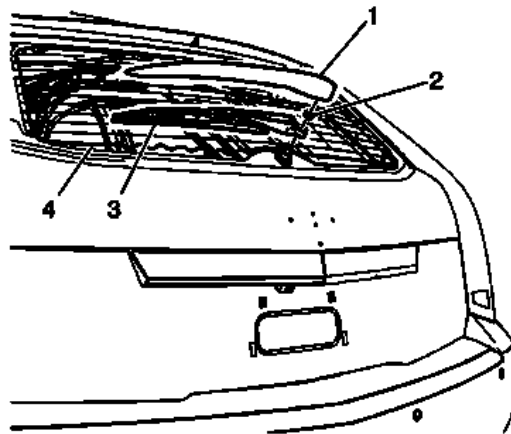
Rear Window Wiper Arm Components (Wagon)
